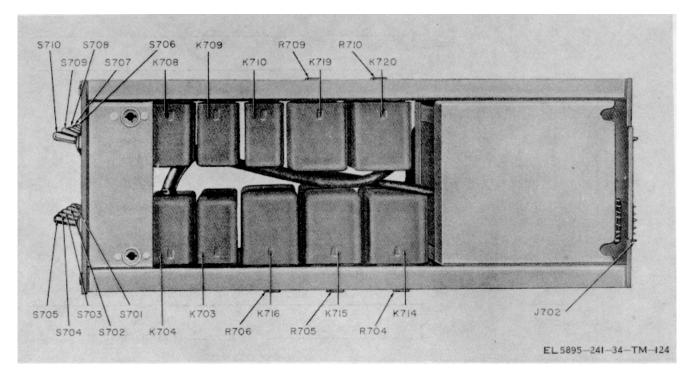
Control, Transmitter C-S446/FSW-8, bottom view, parts location.
